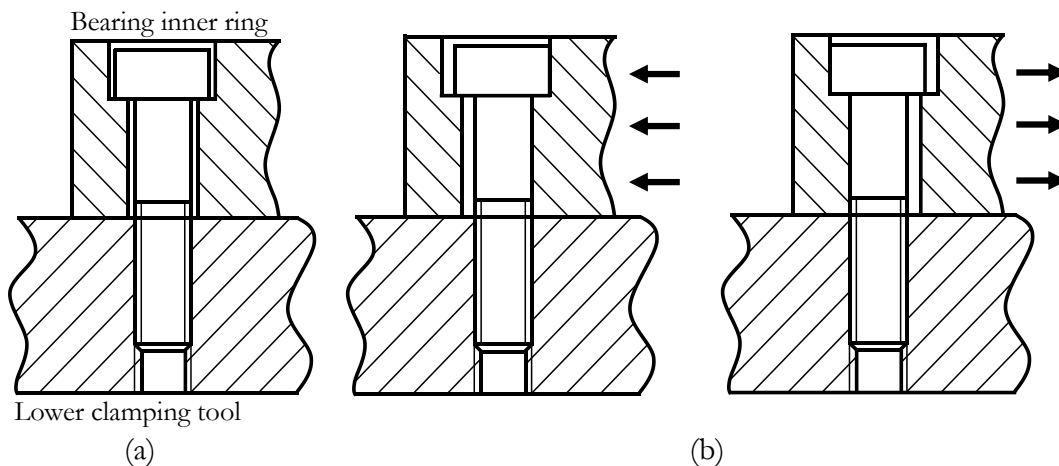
Bearing arrangement: (a) No misalignment; (b) Misalignment.
